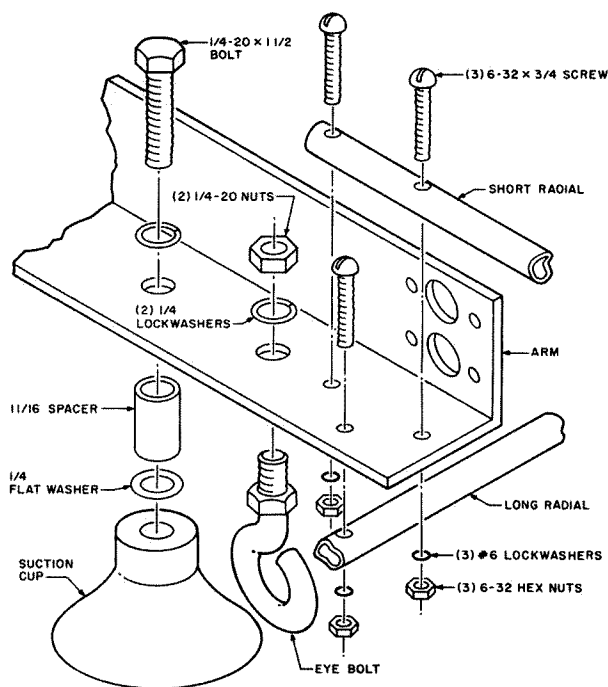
Radial element assembly. The eye bolt and suction cups are required only for car mounting.
